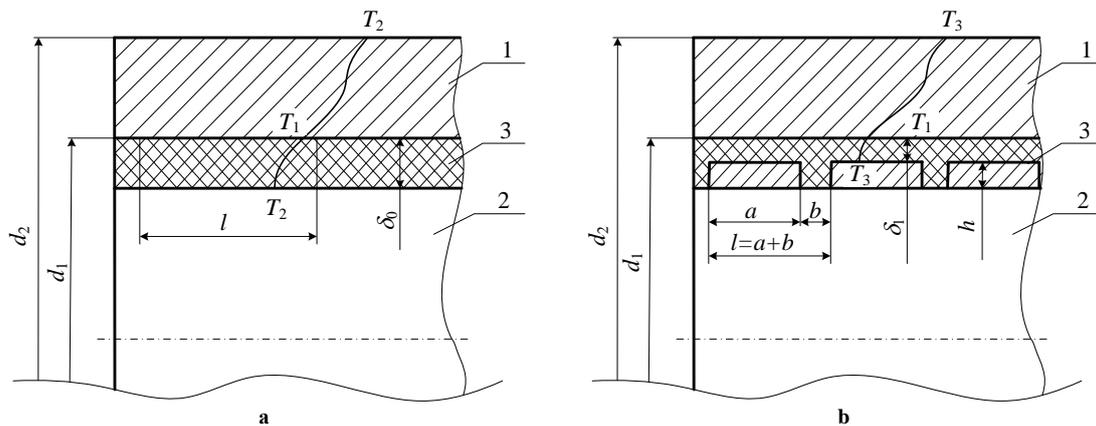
Scheme of tribocoupling of parts "shaft-sleeve with polymer (a) and combined polymer-metal (b) coatings: 1 - sleeve; 2 - shaft; 3 - coating
